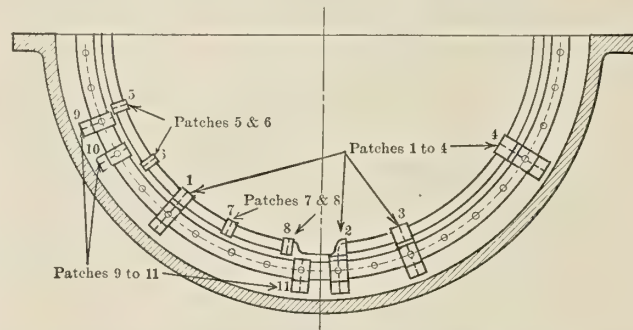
Section at Impulse Wheel Exhaust Belt Looking Forward
